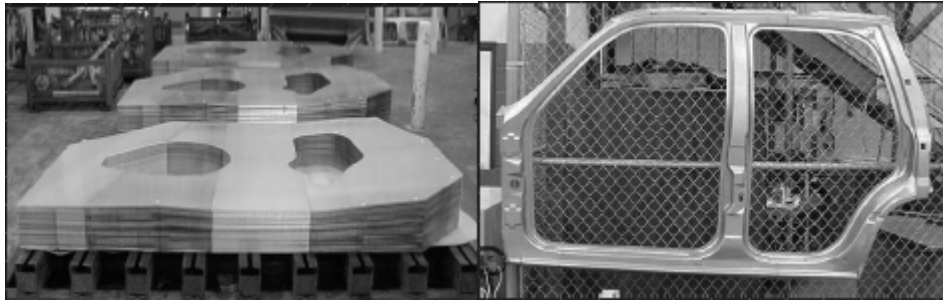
[29]: Tailor Welded Blank Examples in automotive bodies
